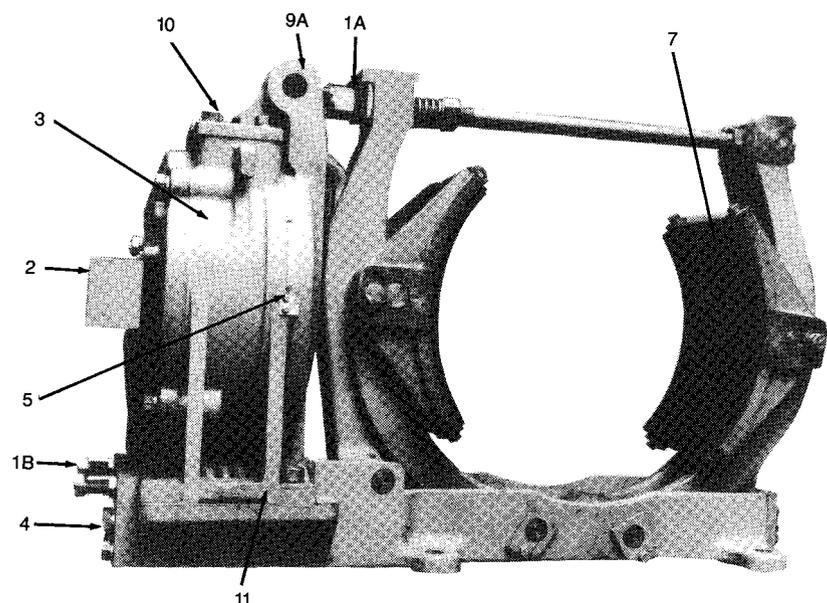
IC9528 A106 magnetic brake 30-inch wheel size
